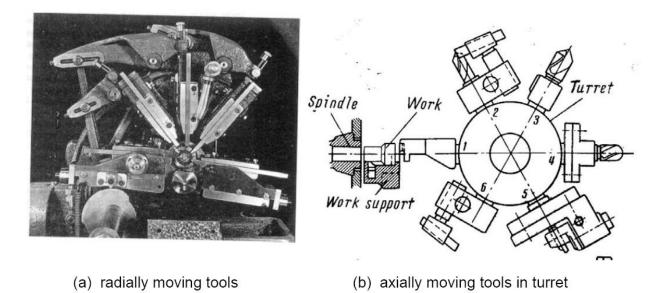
Mounting of tools in single spindle automatic lathe.
